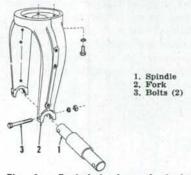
Exploded view of single front wheel fork and associated parts.
